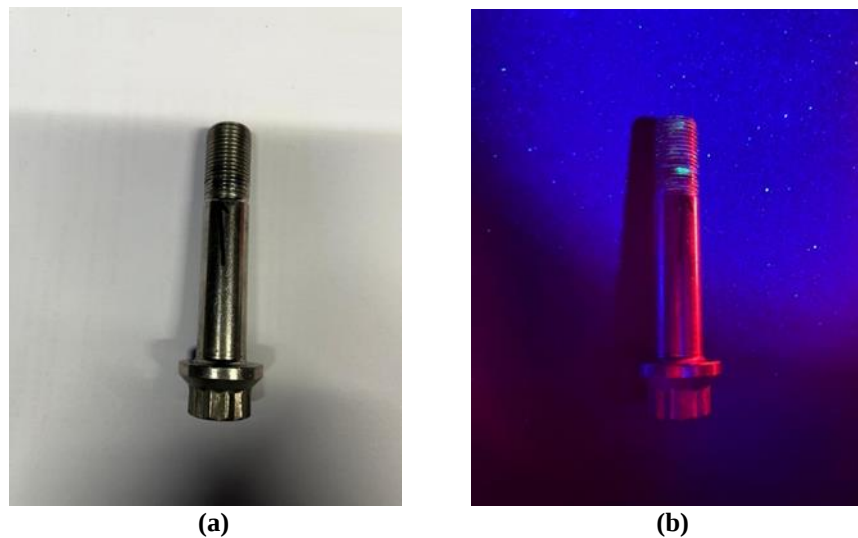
Detection of defects using fluorescent penetrant inspection (a) Before FPI; (b) After FPI
